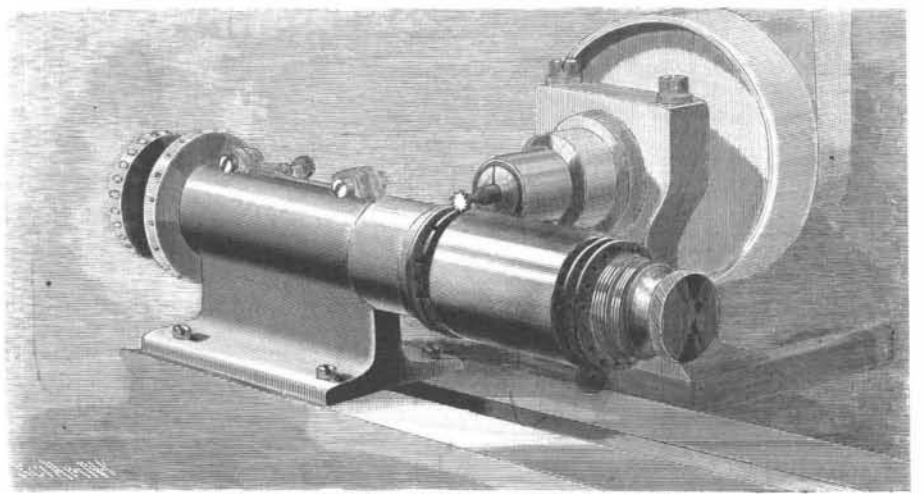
CUTTING SLOTS IN HUB FLANGES.
